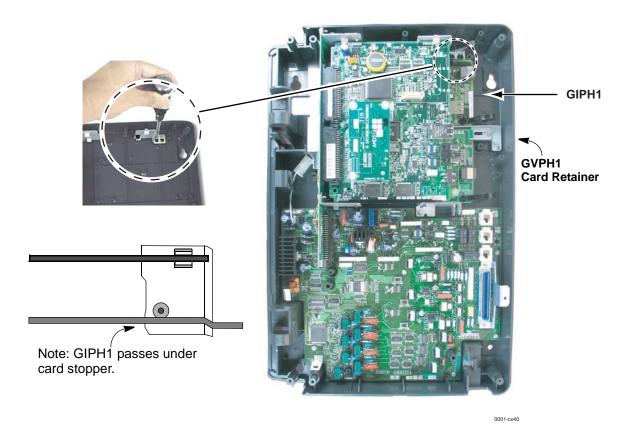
GIPH1 / GCTU2 PCB Stopper
